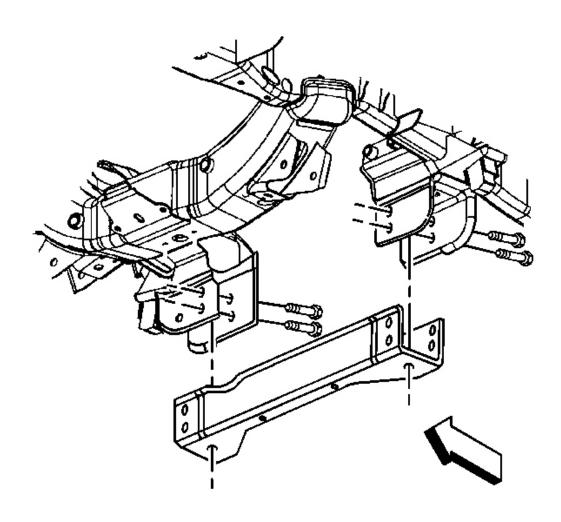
View Of Crossbar Bolts & Bar (2WD) Courtesy of GENERAL MOTORS CORP.
